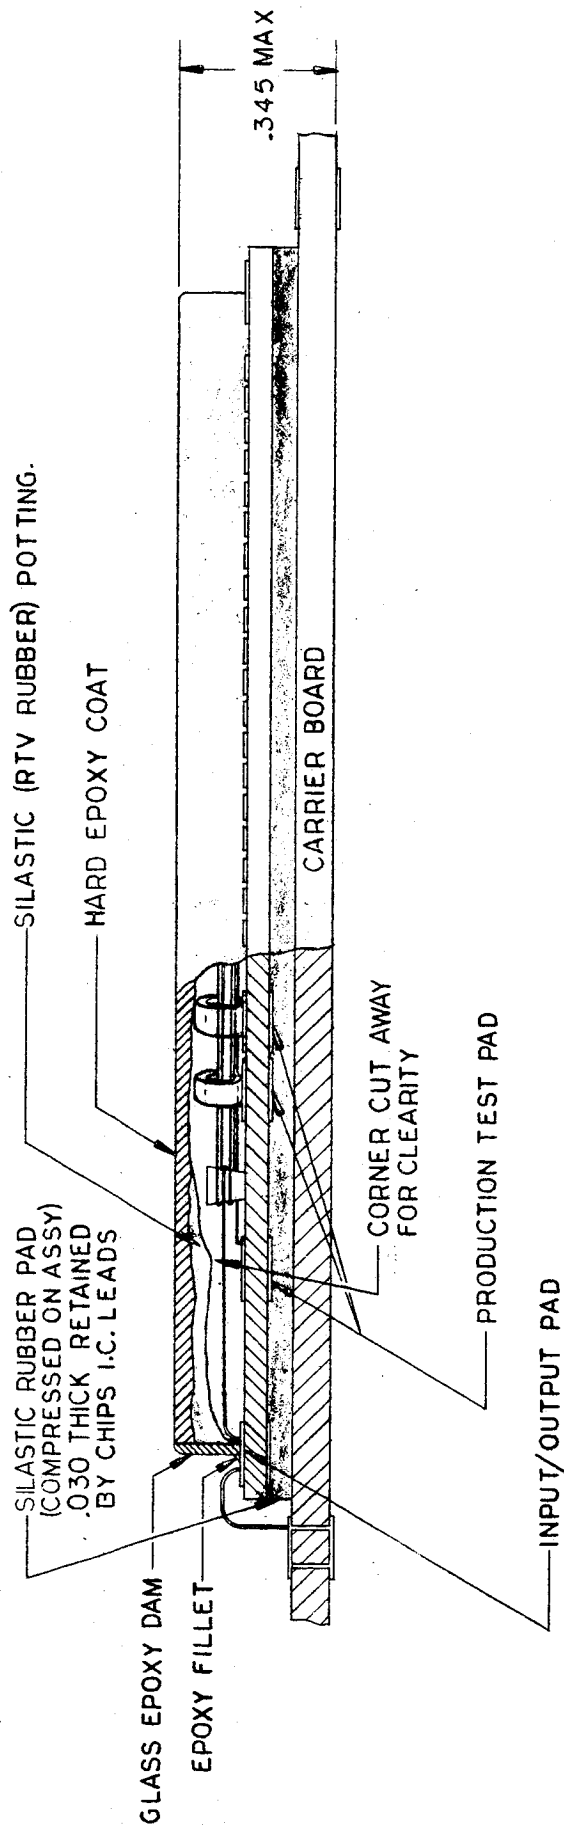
CUTAWAY PROFILE VIEW OF LOGIC MEMORY MODULE MOUNTED ON CARRIER BOARD
